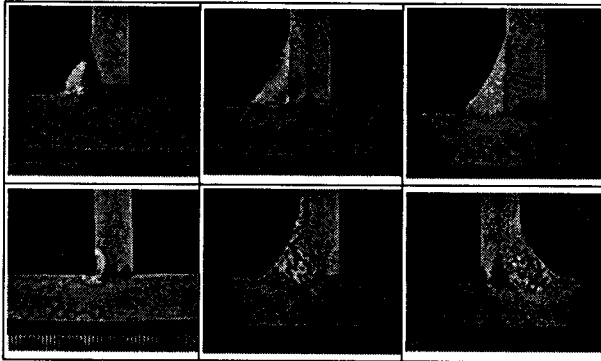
Cross section of MIG/ Laser/ Hybrid (Laser+Arc, Arc+Laser) fillet joints No.200906-03 MIG in 1000mm/min welding speed, No. 200906-04 MIG in 700mm/min welding speed, No. 200906-05 MIG in 600mm/min welding speed, No. 200906-06 Laser welding, No. 220906-01 Laser-arc hybrid welding, No. 220906-02 Arc-laser hybrid welding.
